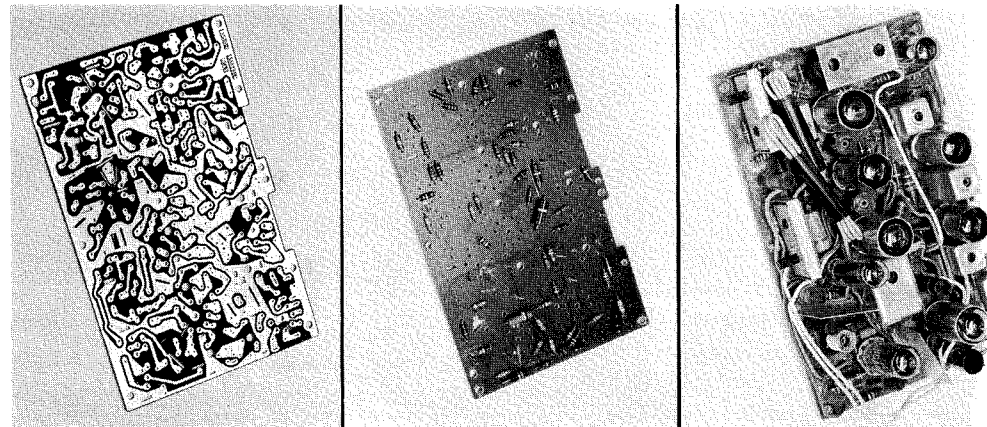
Successive steps in a printed circuit panel. On left is a printed circuit ready for component insertion. Center view shows the reverse side of this board with those components which are now inserted automatically. Right-hand view shows a completed board.
